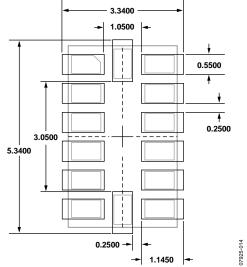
Recommended Printed Wiring Board Land Pattern (Dimensions shown in millimeters)
